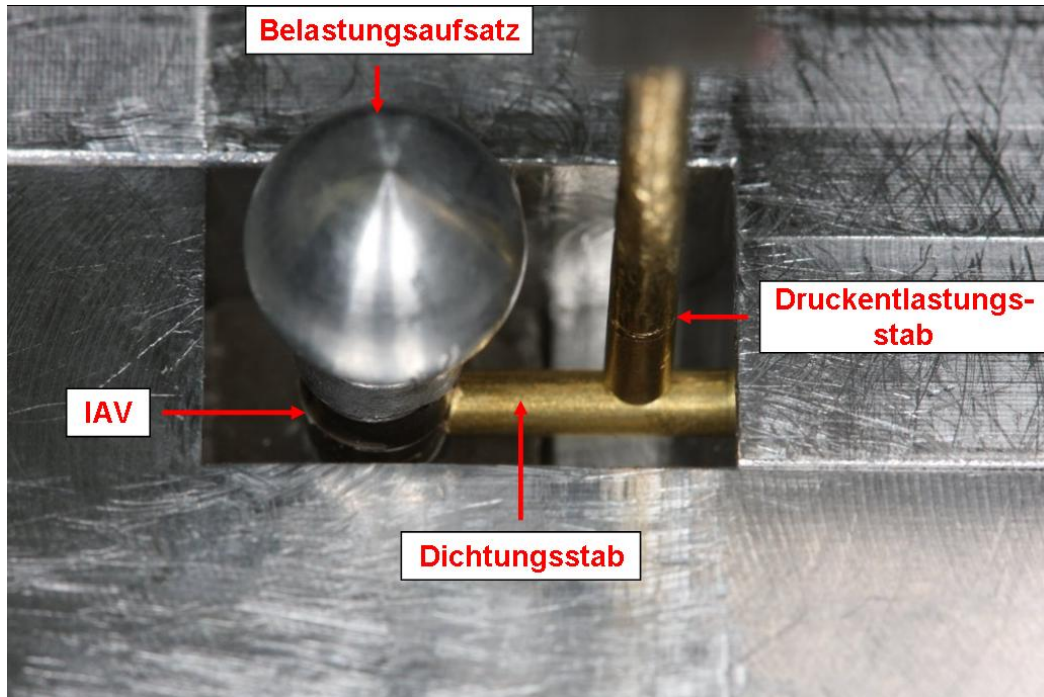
Detail view of the rod arrangement in the embedding device.
